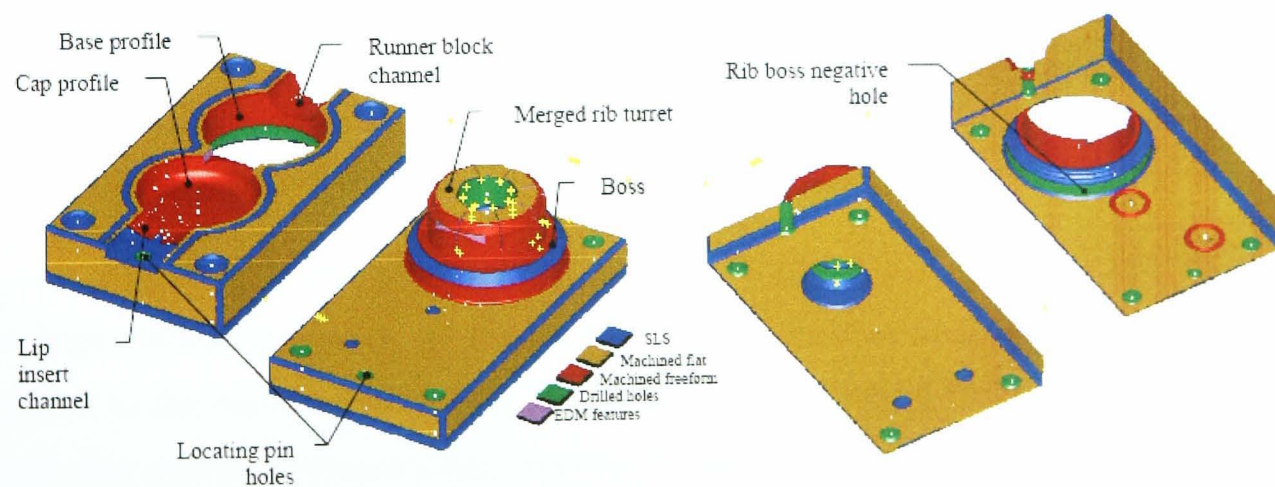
Manufacturing Operation of the Bottom Inserts
